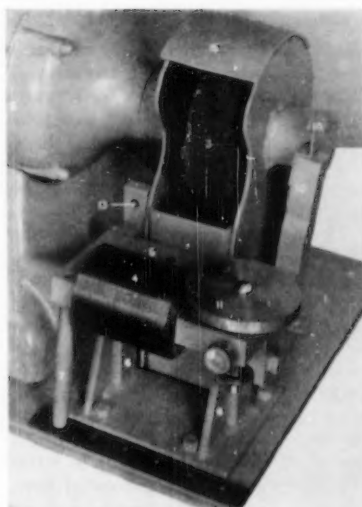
Grinding Machine for Preparing Strip Specimens of Flexible Materials.
